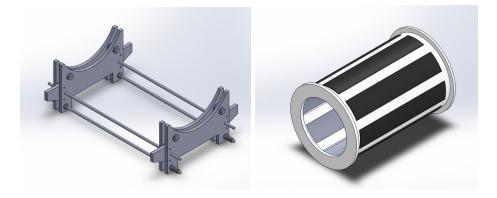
Cradle and Drum with 1/2" PVC End Caps
